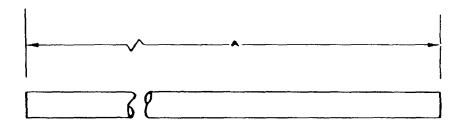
CABLE (PART NO. TYPE C0-04 HDF 4/6-4/12R 1090)
